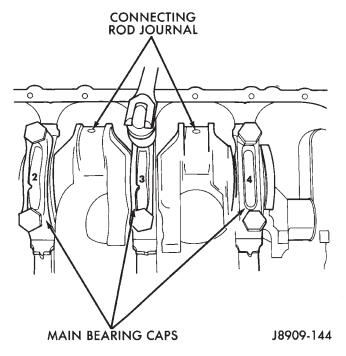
Removing Main Bearing Caps and Lower Inserts
